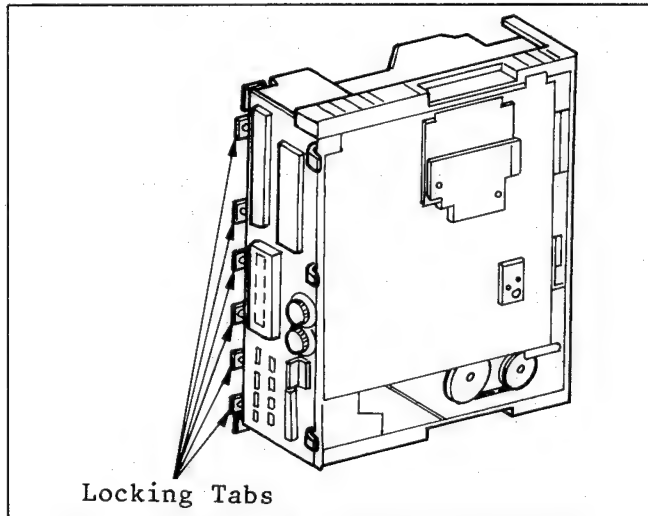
Opening of Bottom & Front P.C. Boards-(2)
